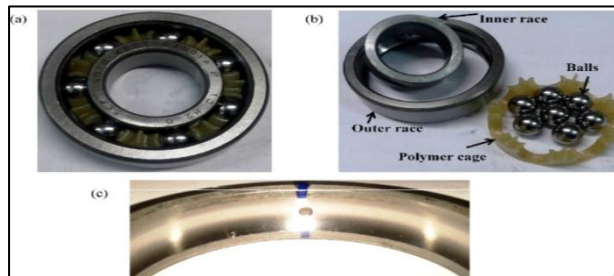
Image of the test bearing and the defect (a) test bearing (b) components of the test bearing (c) circular defection outer race
